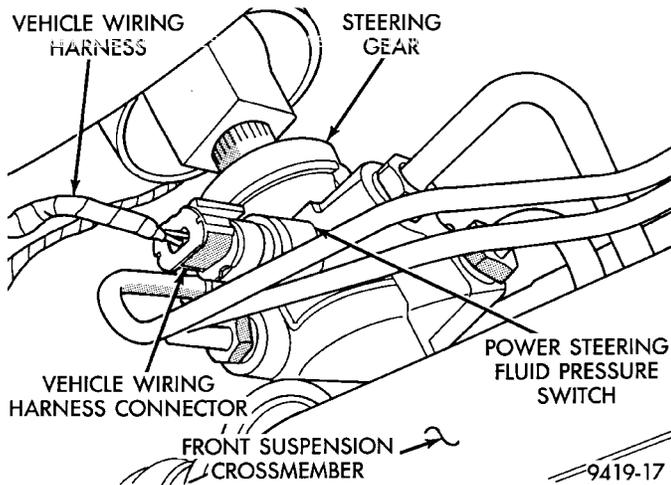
Power Steering Fluid Pressure Switch Electrical Connector
